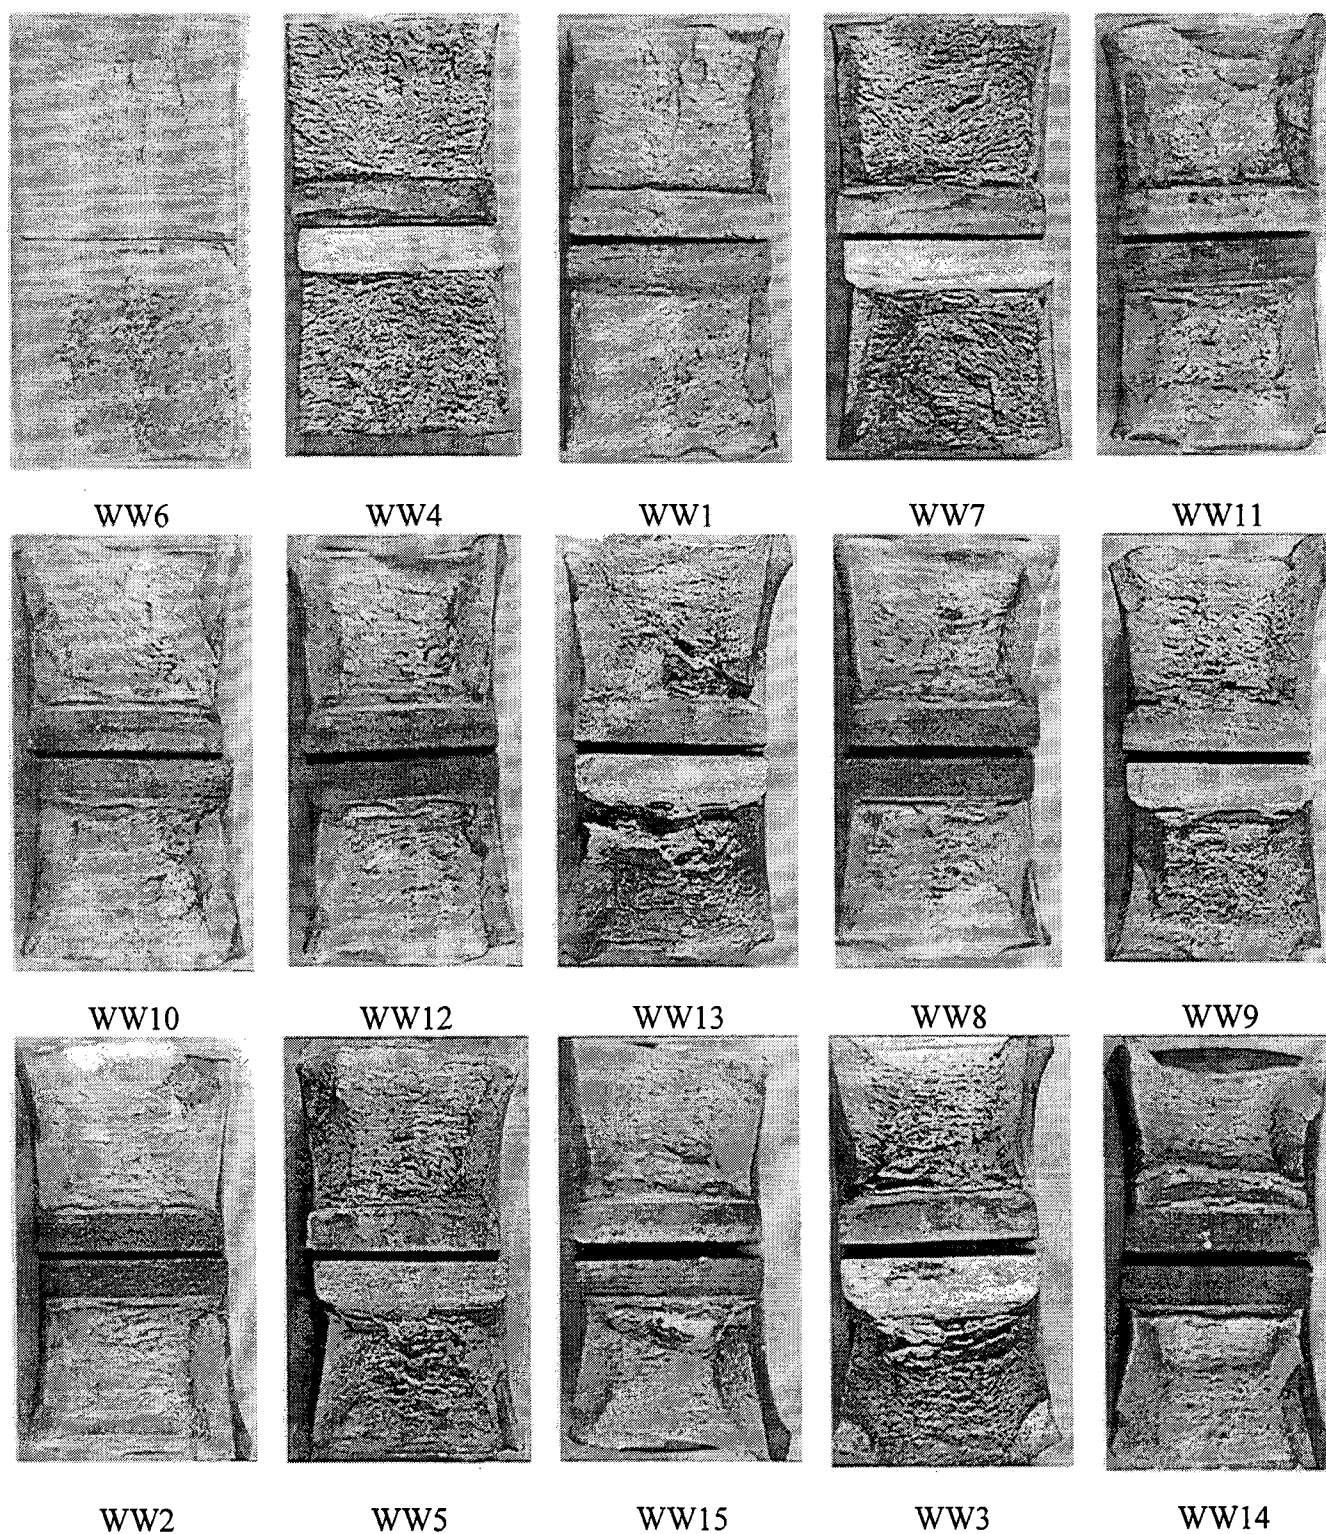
Charpy Impact Specimen Fracture Surfaces for Watts Bar Unit 1 Reactor Vessel Weld Metal
